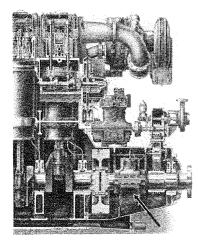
After cylinders of Diesel engine, showing built-in two-shoe thrust bearing.
